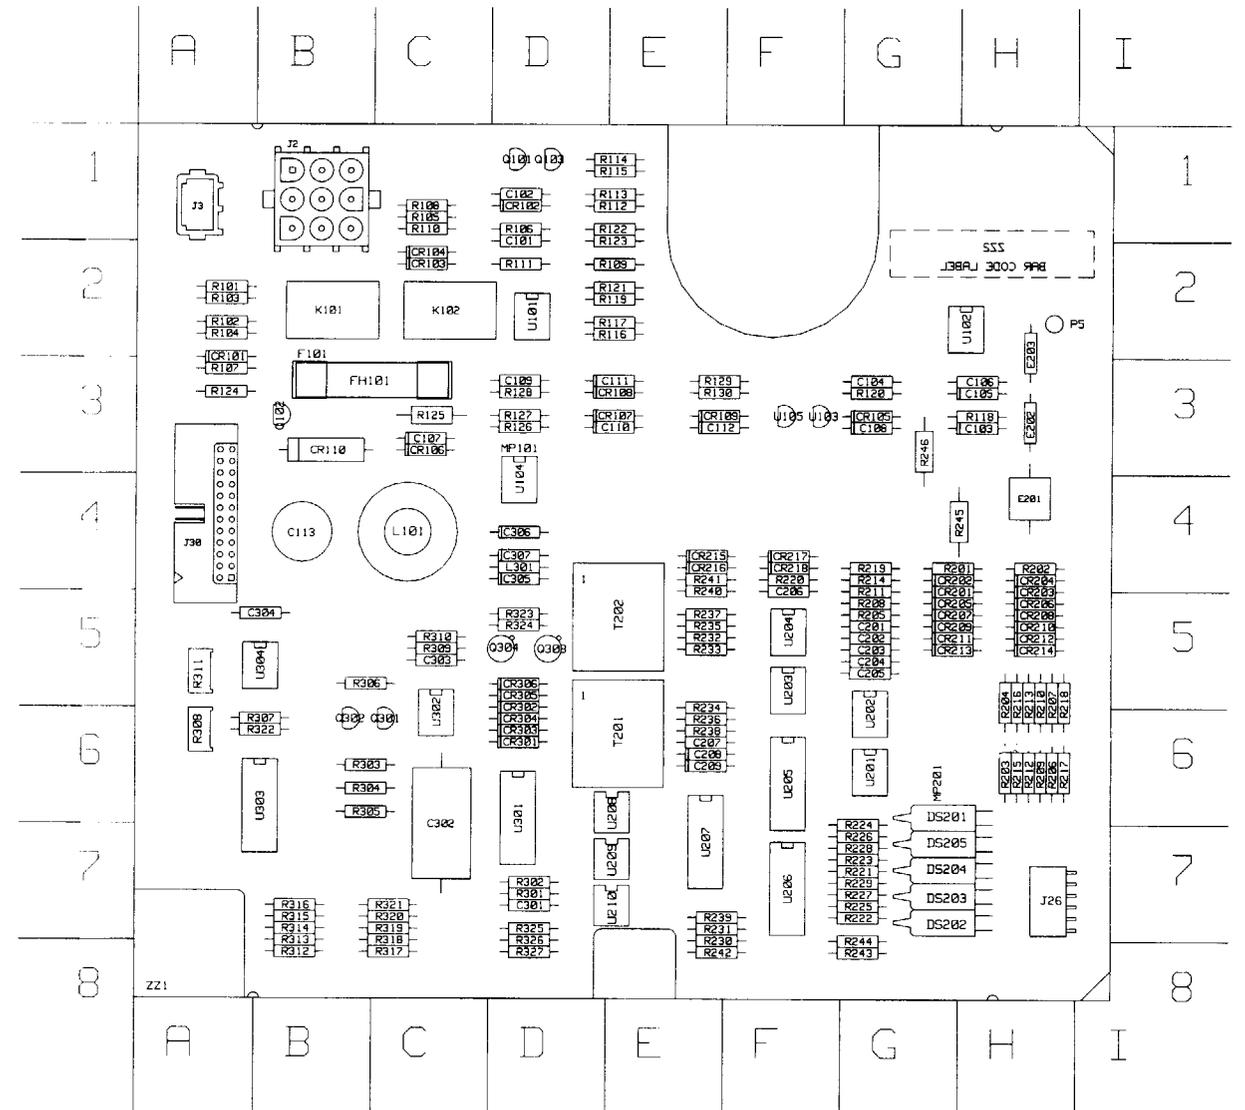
A2A3 ECG/Power Supply Circuit Card Assembly Component Locator and Schematic Diagram (Sheet 1 of 4).
